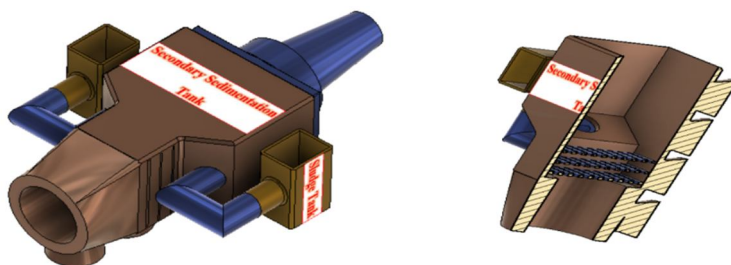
On left: Isometric View; On Right: Hollow Cross sectional View of the Secondary Tank w/ Screening System and Sludge Tank.
